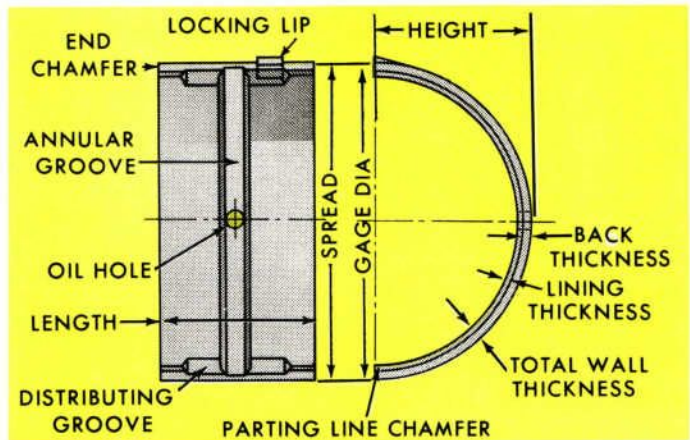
TYPICAL SLEEVE - TYPE BEARING HALF
